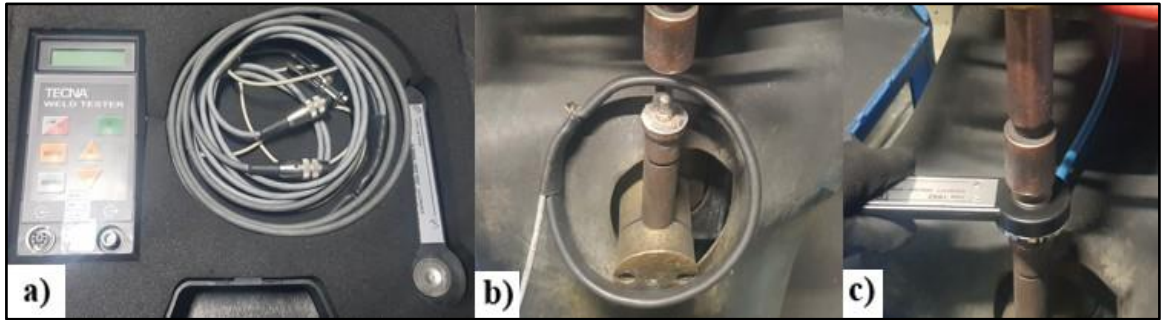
a) Tecna weld tester, b) current testing c) force testing (a) Tecna kaynak test cihazı, b) akım testi, c) kuvvet testi)
